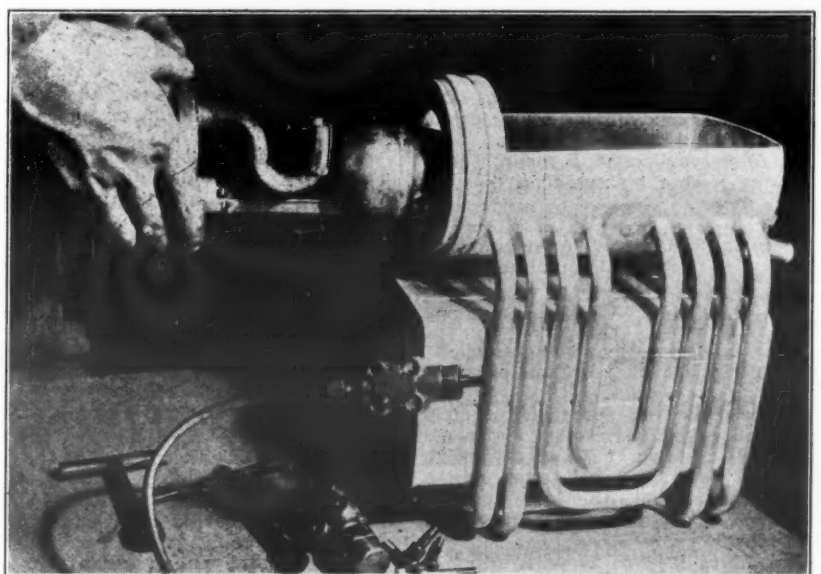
Method of assembling the float and header assembly in the test fixture to test the buoyancy of the float and header assembly.
